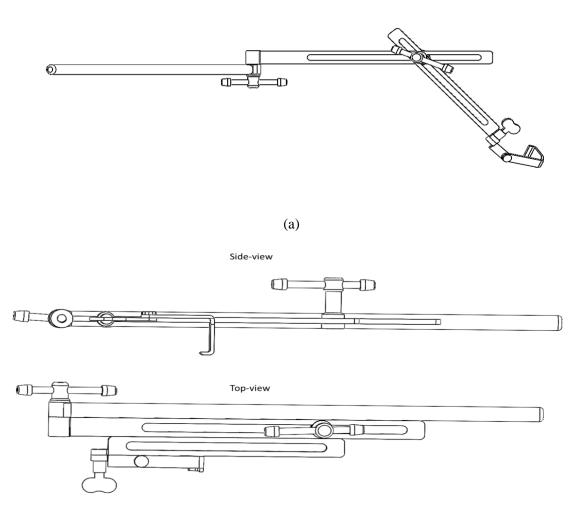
The design of the telescopic retractor, a) open form and b) folded form
